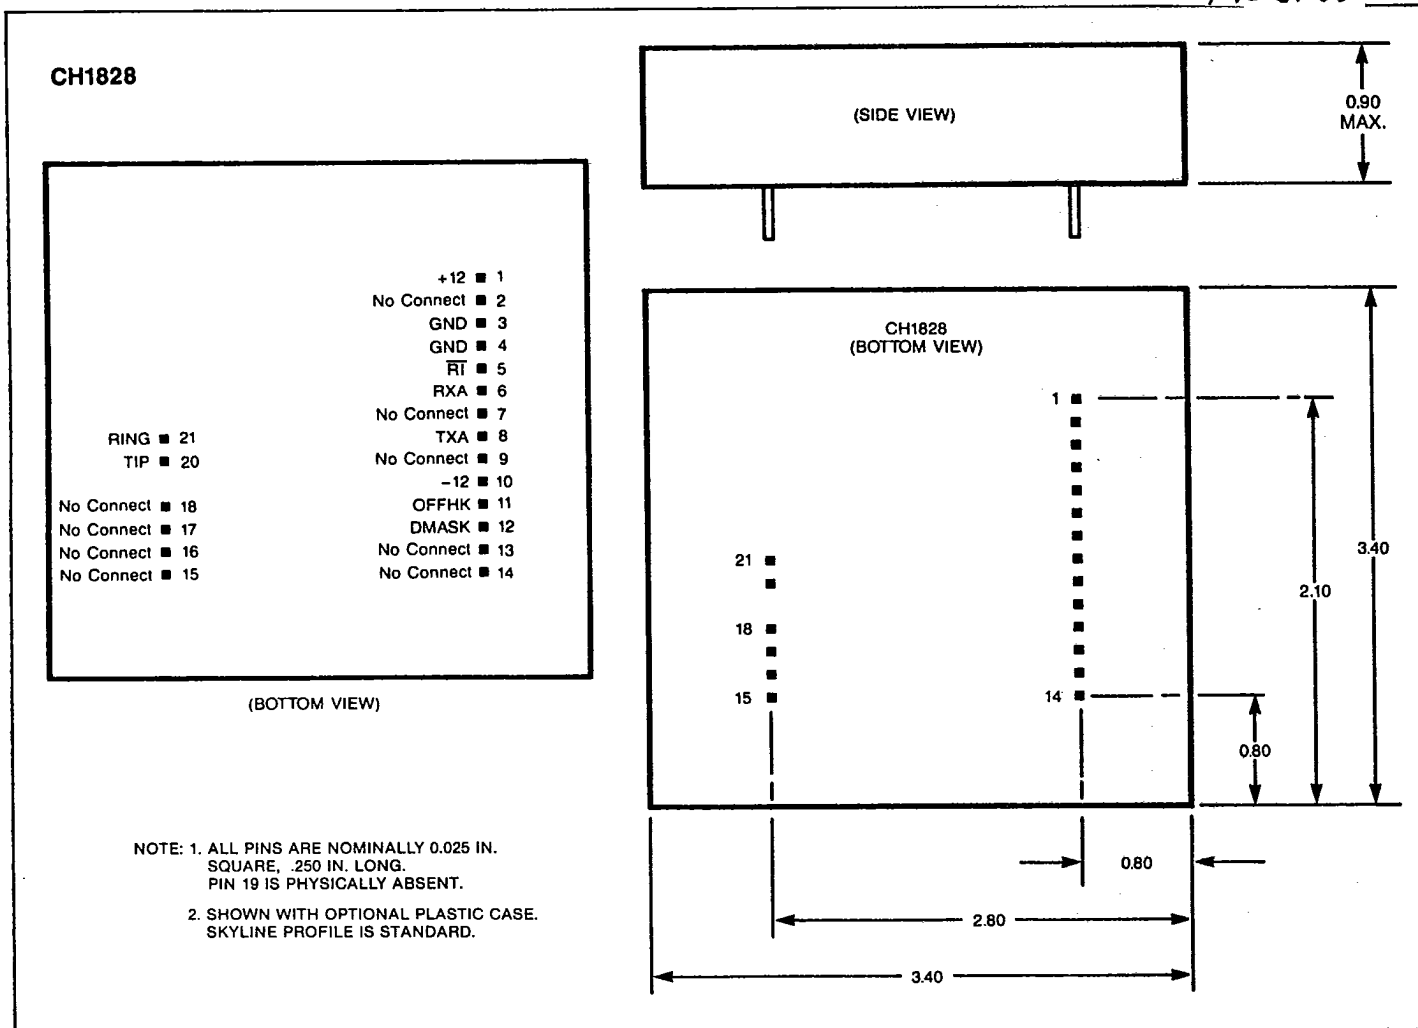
CH1828 Pin Configuration and Physical Dimensions
